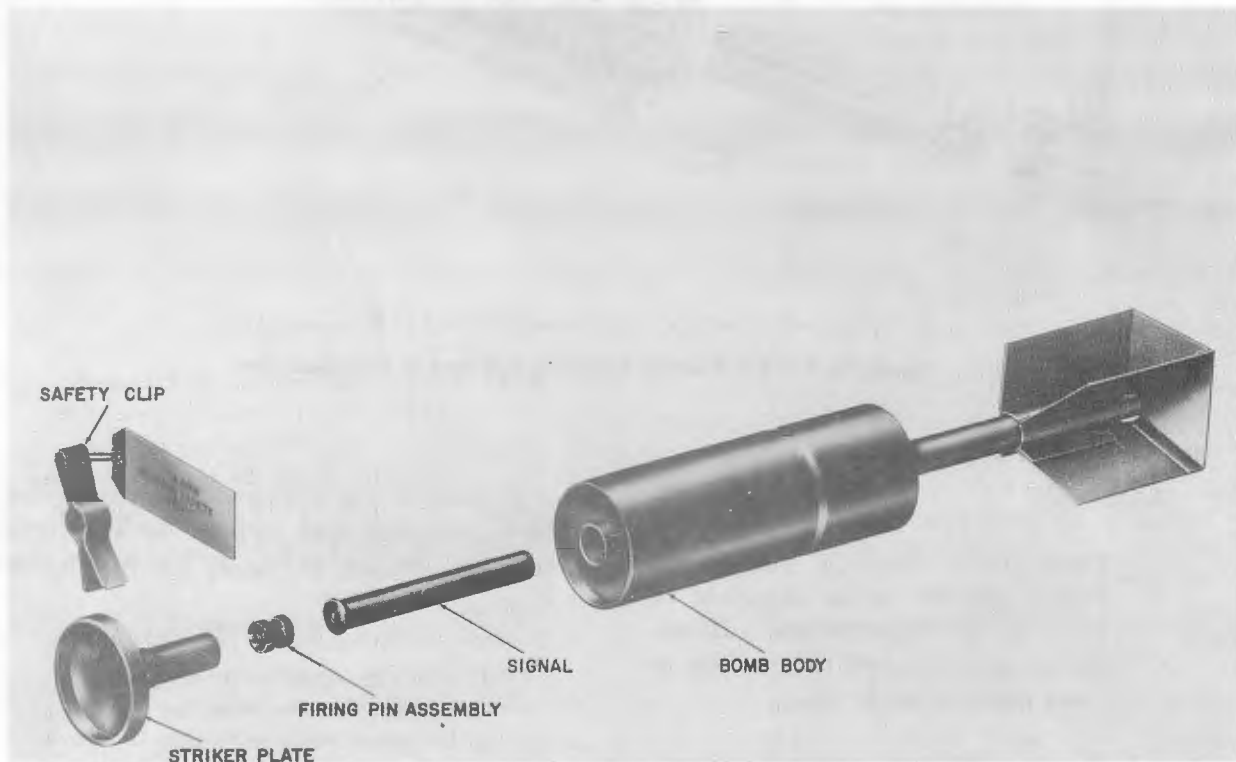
5-lb Practice Bomb Mark 106 Mod 1, Exploded View.
